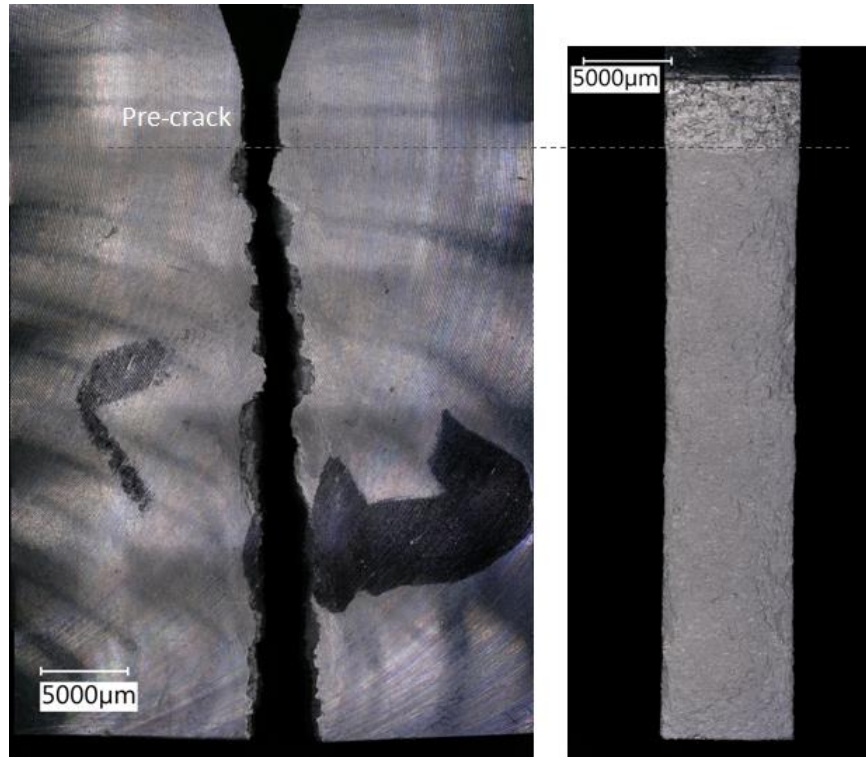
Fracture surfaces of 2050-T8 base material
